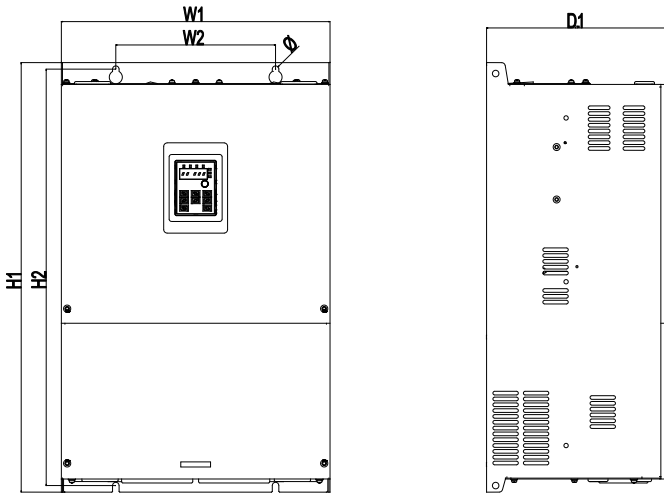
Wall installation diagram for 380V 75kW VFD models
